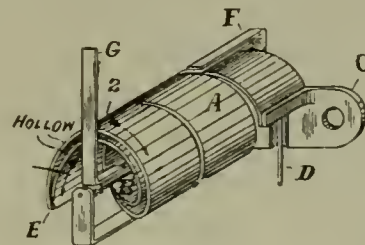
INDICATING AND COMPENSATING SPRINGS. concentric with the indicating spring, as shown, and is mechanically attached at *E*, there being no opening or connection between the interiors of the two springs. At the free end of the compensating spring a bracket *F* is soldered, making a rigid connection to a shaft through the center of the springs. At the front end of the shaft the recording arm *G* is rigidly secured.
